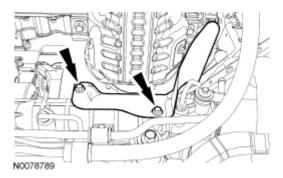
Locating Power Steering Rack Heat Shield Bolts
